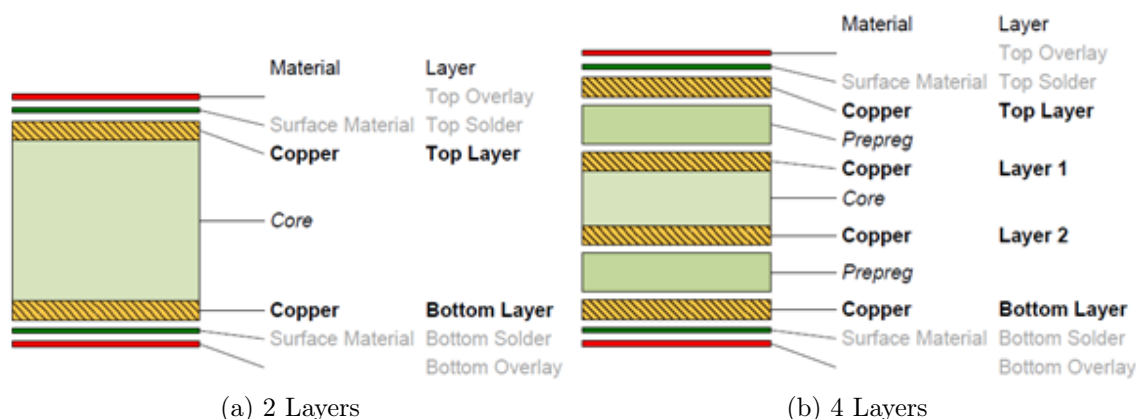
Standard 2-Layer and 4-Layer stack of a printed circuit board.
